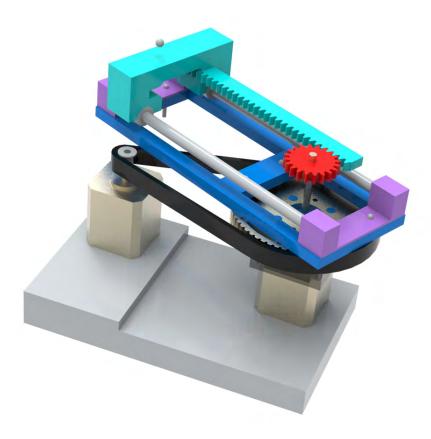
Finished CAD assembly in Solid Edge. [1]
